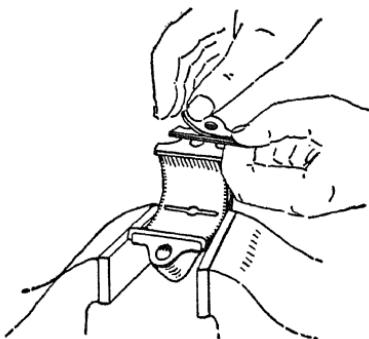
Peeling Laminated Shims When Adjusting Connecting-Rod Bearings
